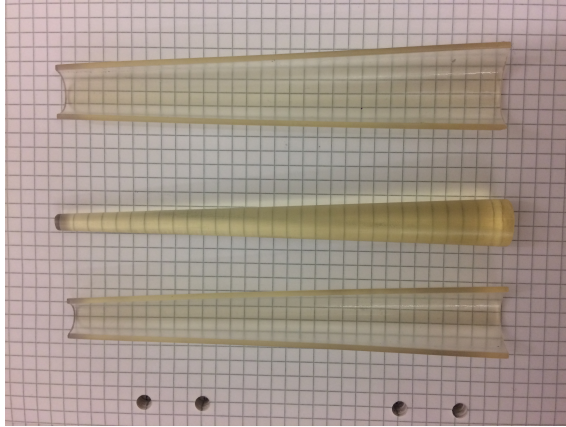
Mold for vessel phantom consisting of five parts, only three are shown. At the top of the image one of two identical parts of the first outside contour can be seen. In the middle of the image the inner contour is seen. Below in the image is one of two identical parts of the second outside contour.
